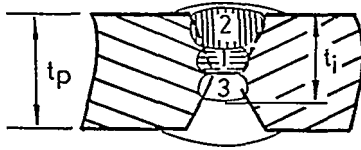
Illustration of Butt Weld Cross Section Height t_i for Various Plate Edge Geometries [5].
